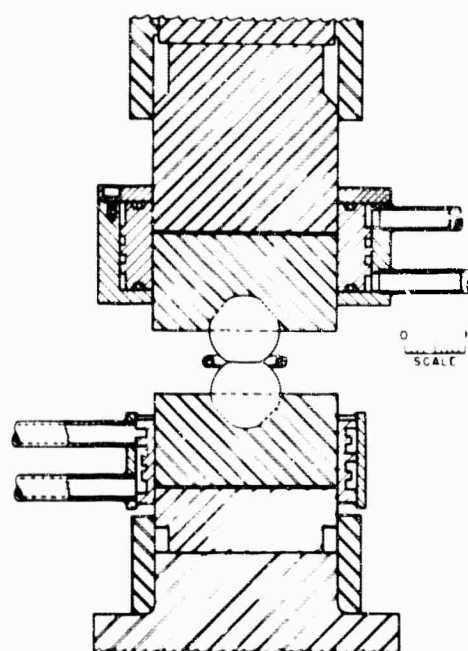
Schematic Drawing of Anvil Assembly Showing Spherical Opposed Anvils
